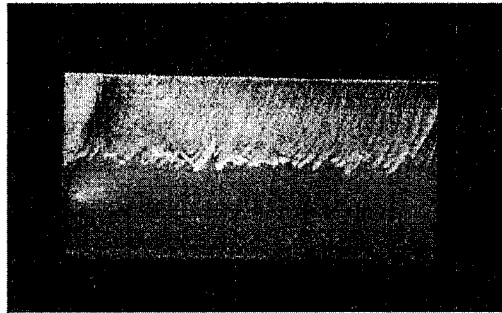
A cutting view of partial penetration on an aluminum specimen.
